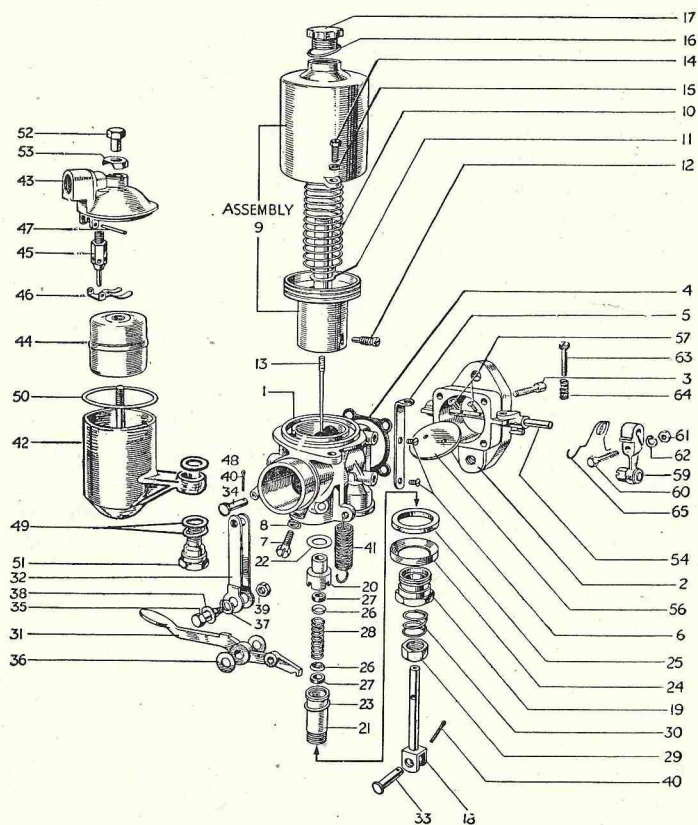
EXPLODED VIEW OF S.U. CARBURETTER TYPE MC2.
